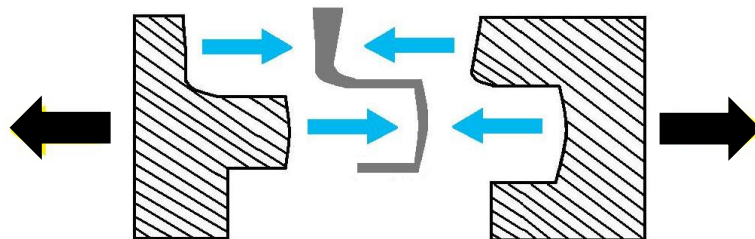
Basic permanent mold is open and solidified casting is ejected
